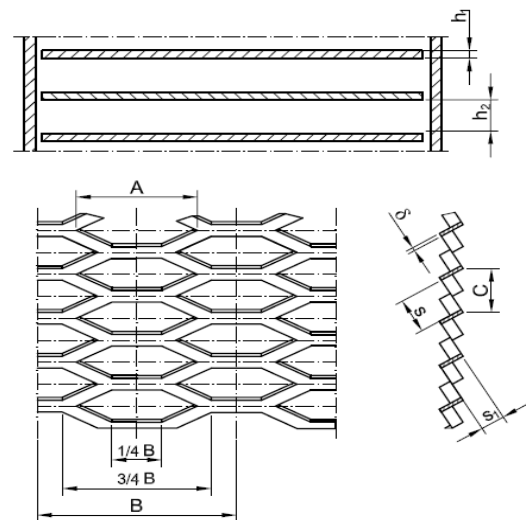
Packing sheet made of expanded section from metal sheet with main dimensions
